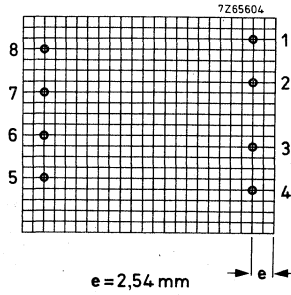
Hole pattern (viewed from printed-wiring side) for mounting on a printed-wiring board, hole diameter $1,3 + 0,1$ mm.
